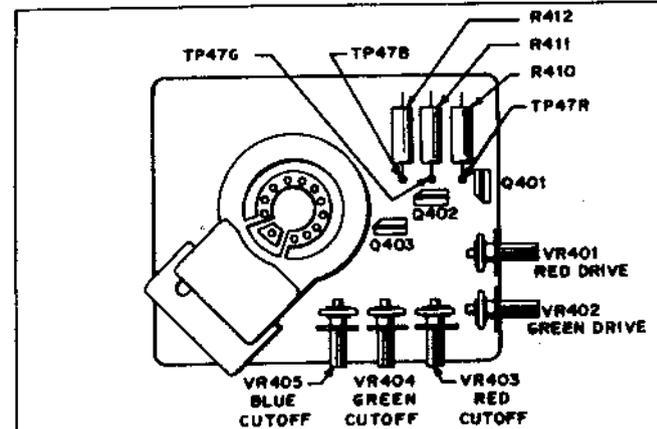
Component Side of Neck Board (with horizontally mounted CRT)
